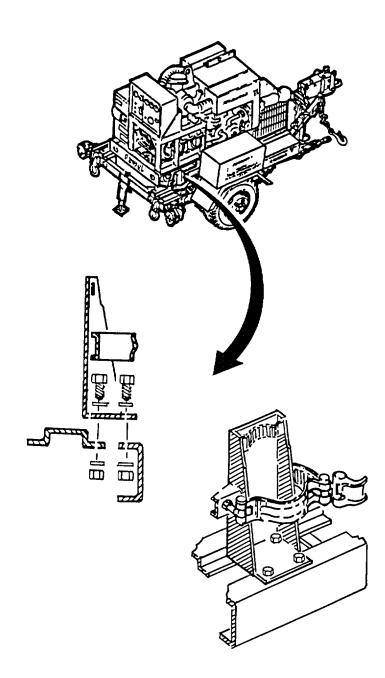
Mounting Bracket, Fire Extinguisher.
